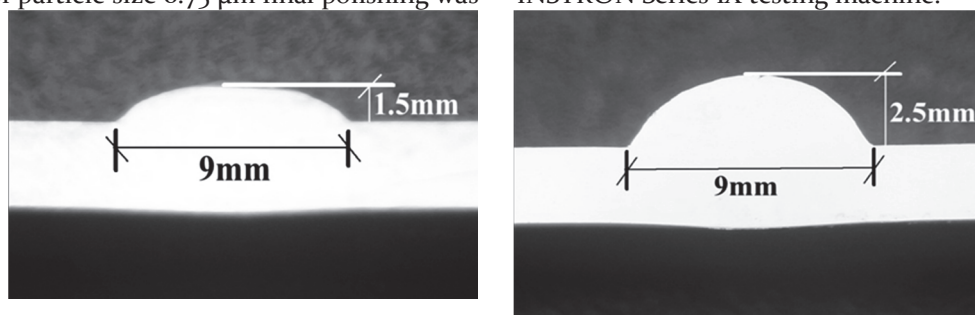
Weld bead comparison of single pass (left) and double pass (right) welding
